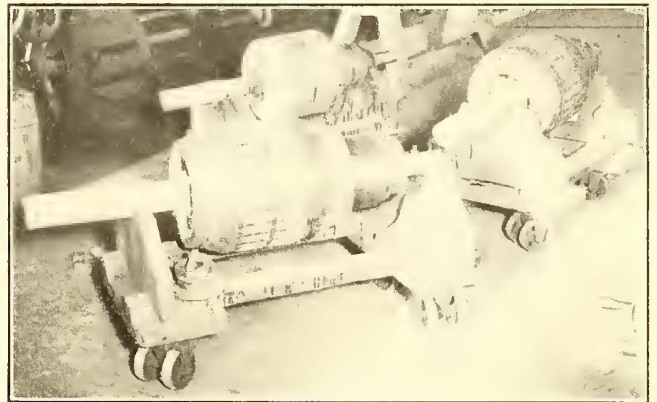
San Francisco Welding—Armature Shaft Ready for Machining
